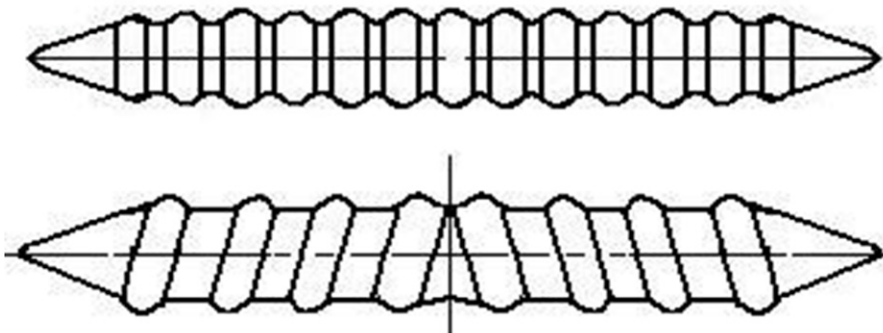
Exemplary shapes of burnishing rollers with increased contact pressures for use in the burnishing tool from Fig. 3
